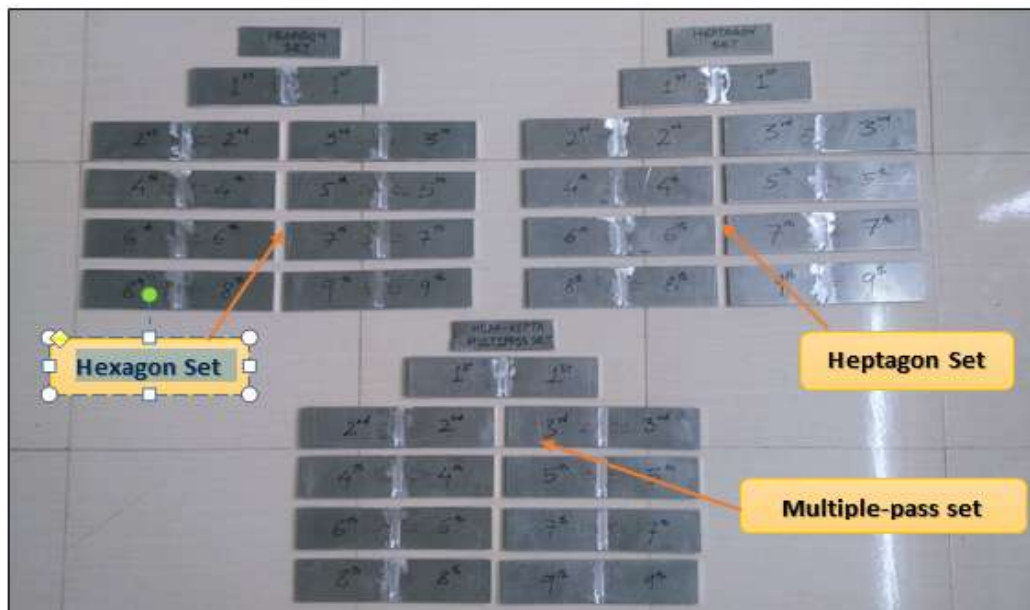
All 27 (9 each case) specimens after completion of weld
